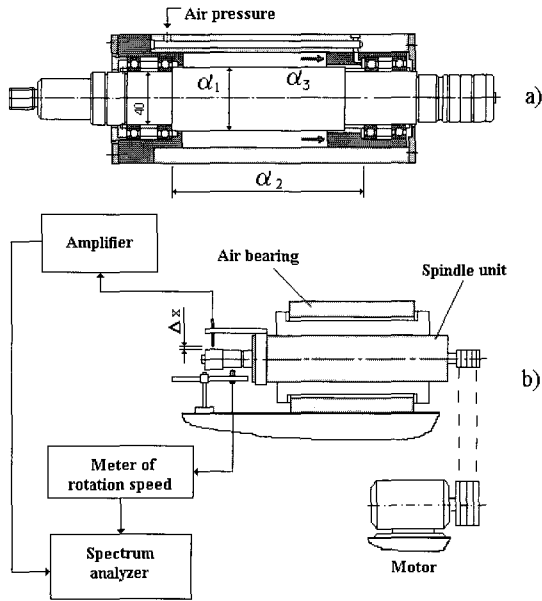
Grinding spindle unit (a) and layout of the experimental rig (b)
